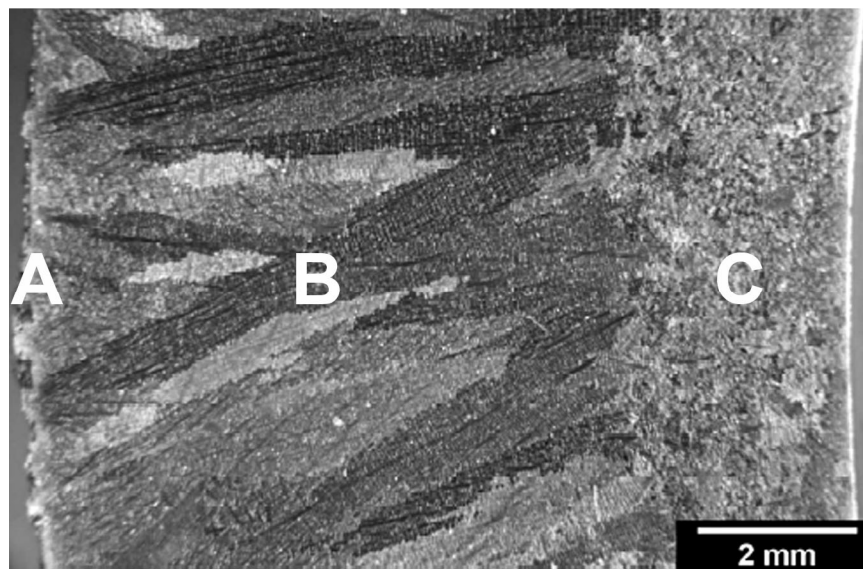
Cross-section of a typical HP reformer tube macroscopic structure due to the Centrifugal casting method [2].
